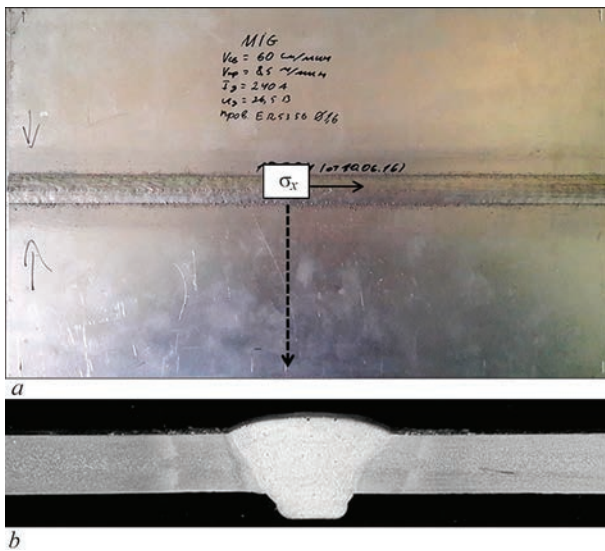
Specimen of butt joint of 1561 alloy: *a* — outer appearance of butt joint specimen, where a solid arrow shows the direction of σ_x action, a dotted line — the direction of stress registration by the UT and ESPI methods; *b* — macrosection of welded joint by a single-pass MIG welding. The appearance of the macrosection of the welded joint is shown in Figure 1, *b*. MIG welding mode, residual longitudinal f_1 – f_3 and transverse Δ_1 , Δ_2 deflections of the plate after welding are presented in Table 2.
